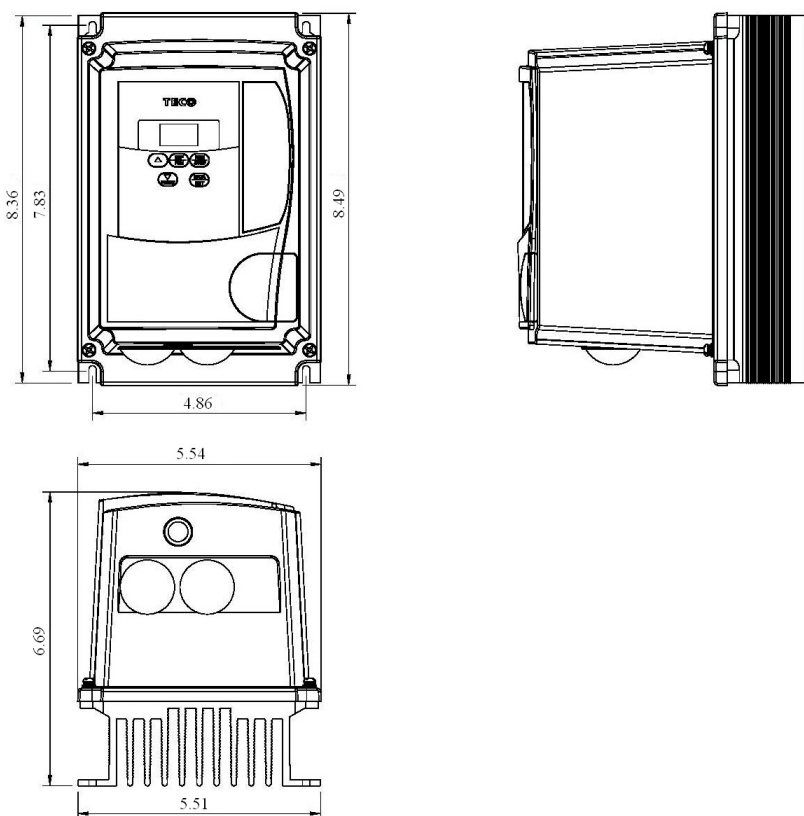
EV Drive IP65 (no switch) Frame 1 dimensions
